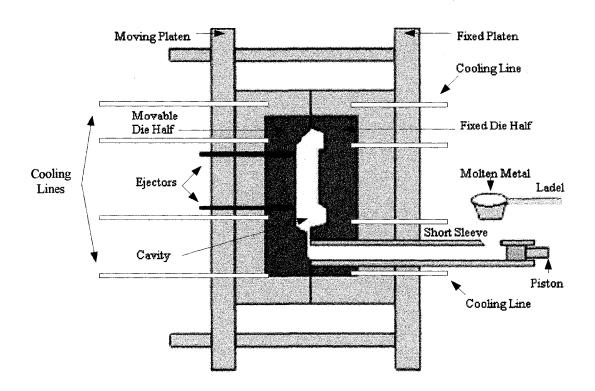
Schematic Diagram of a Die Casting Machine.
